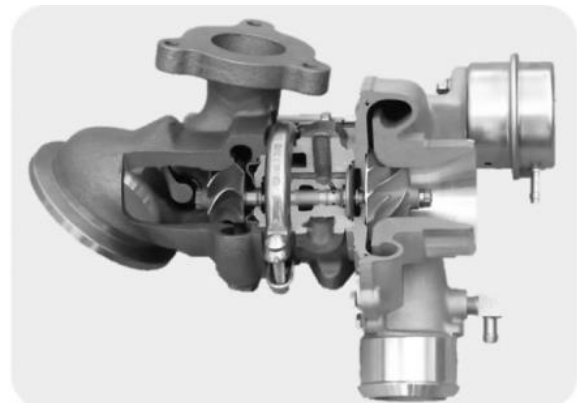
Section view of gasoline engine turbocharger with wastegate
